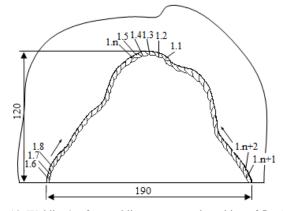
Welding/surface welding sequence, deposition of first layer.
